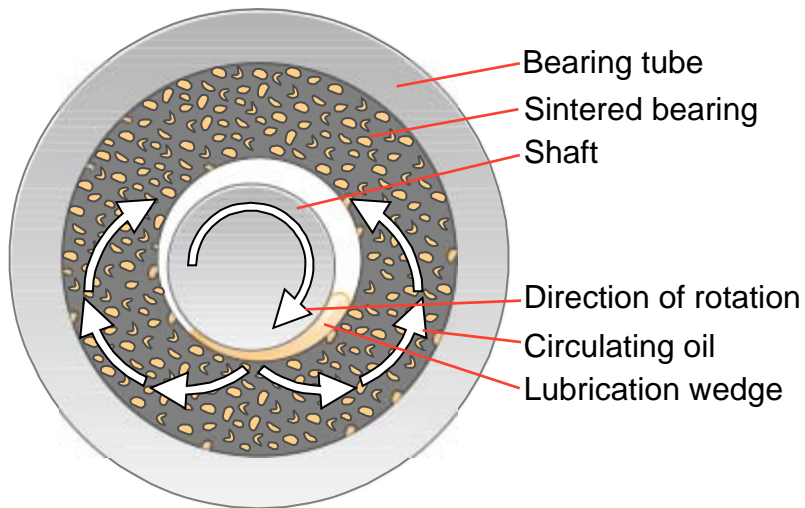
Bearing gap conditions as found in sintered sleeve bearings
